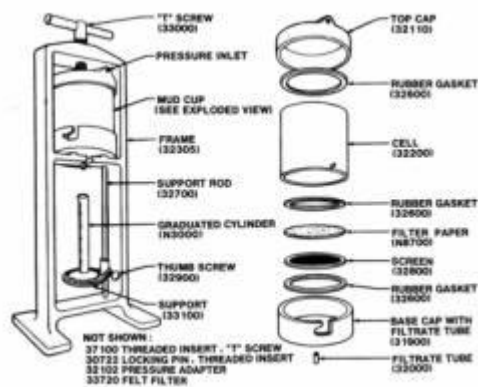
Filter Press And Cell Assembly, Exploded View
